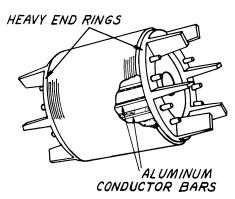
Rotor for a squirrel-cage motor. (The Lincoln Electric Co.)
